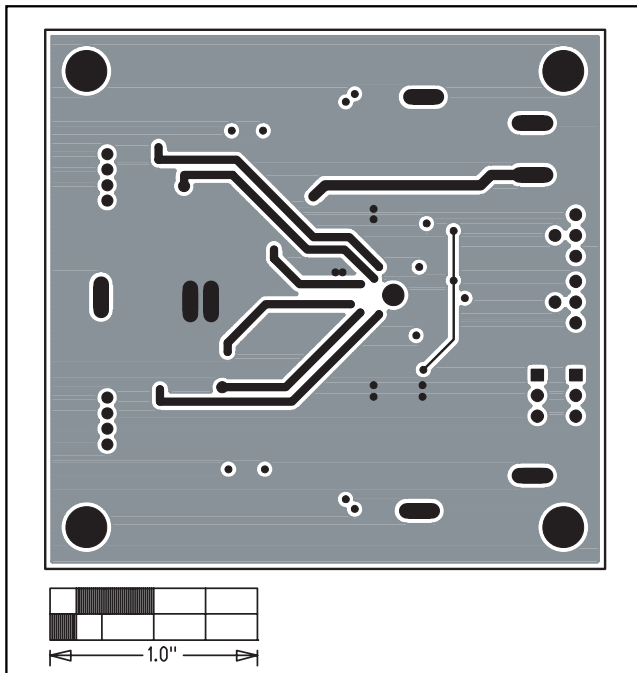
MAX8716 EV Kit PC Board Layout—Internal Layer 2, PGND/Signal Plane
